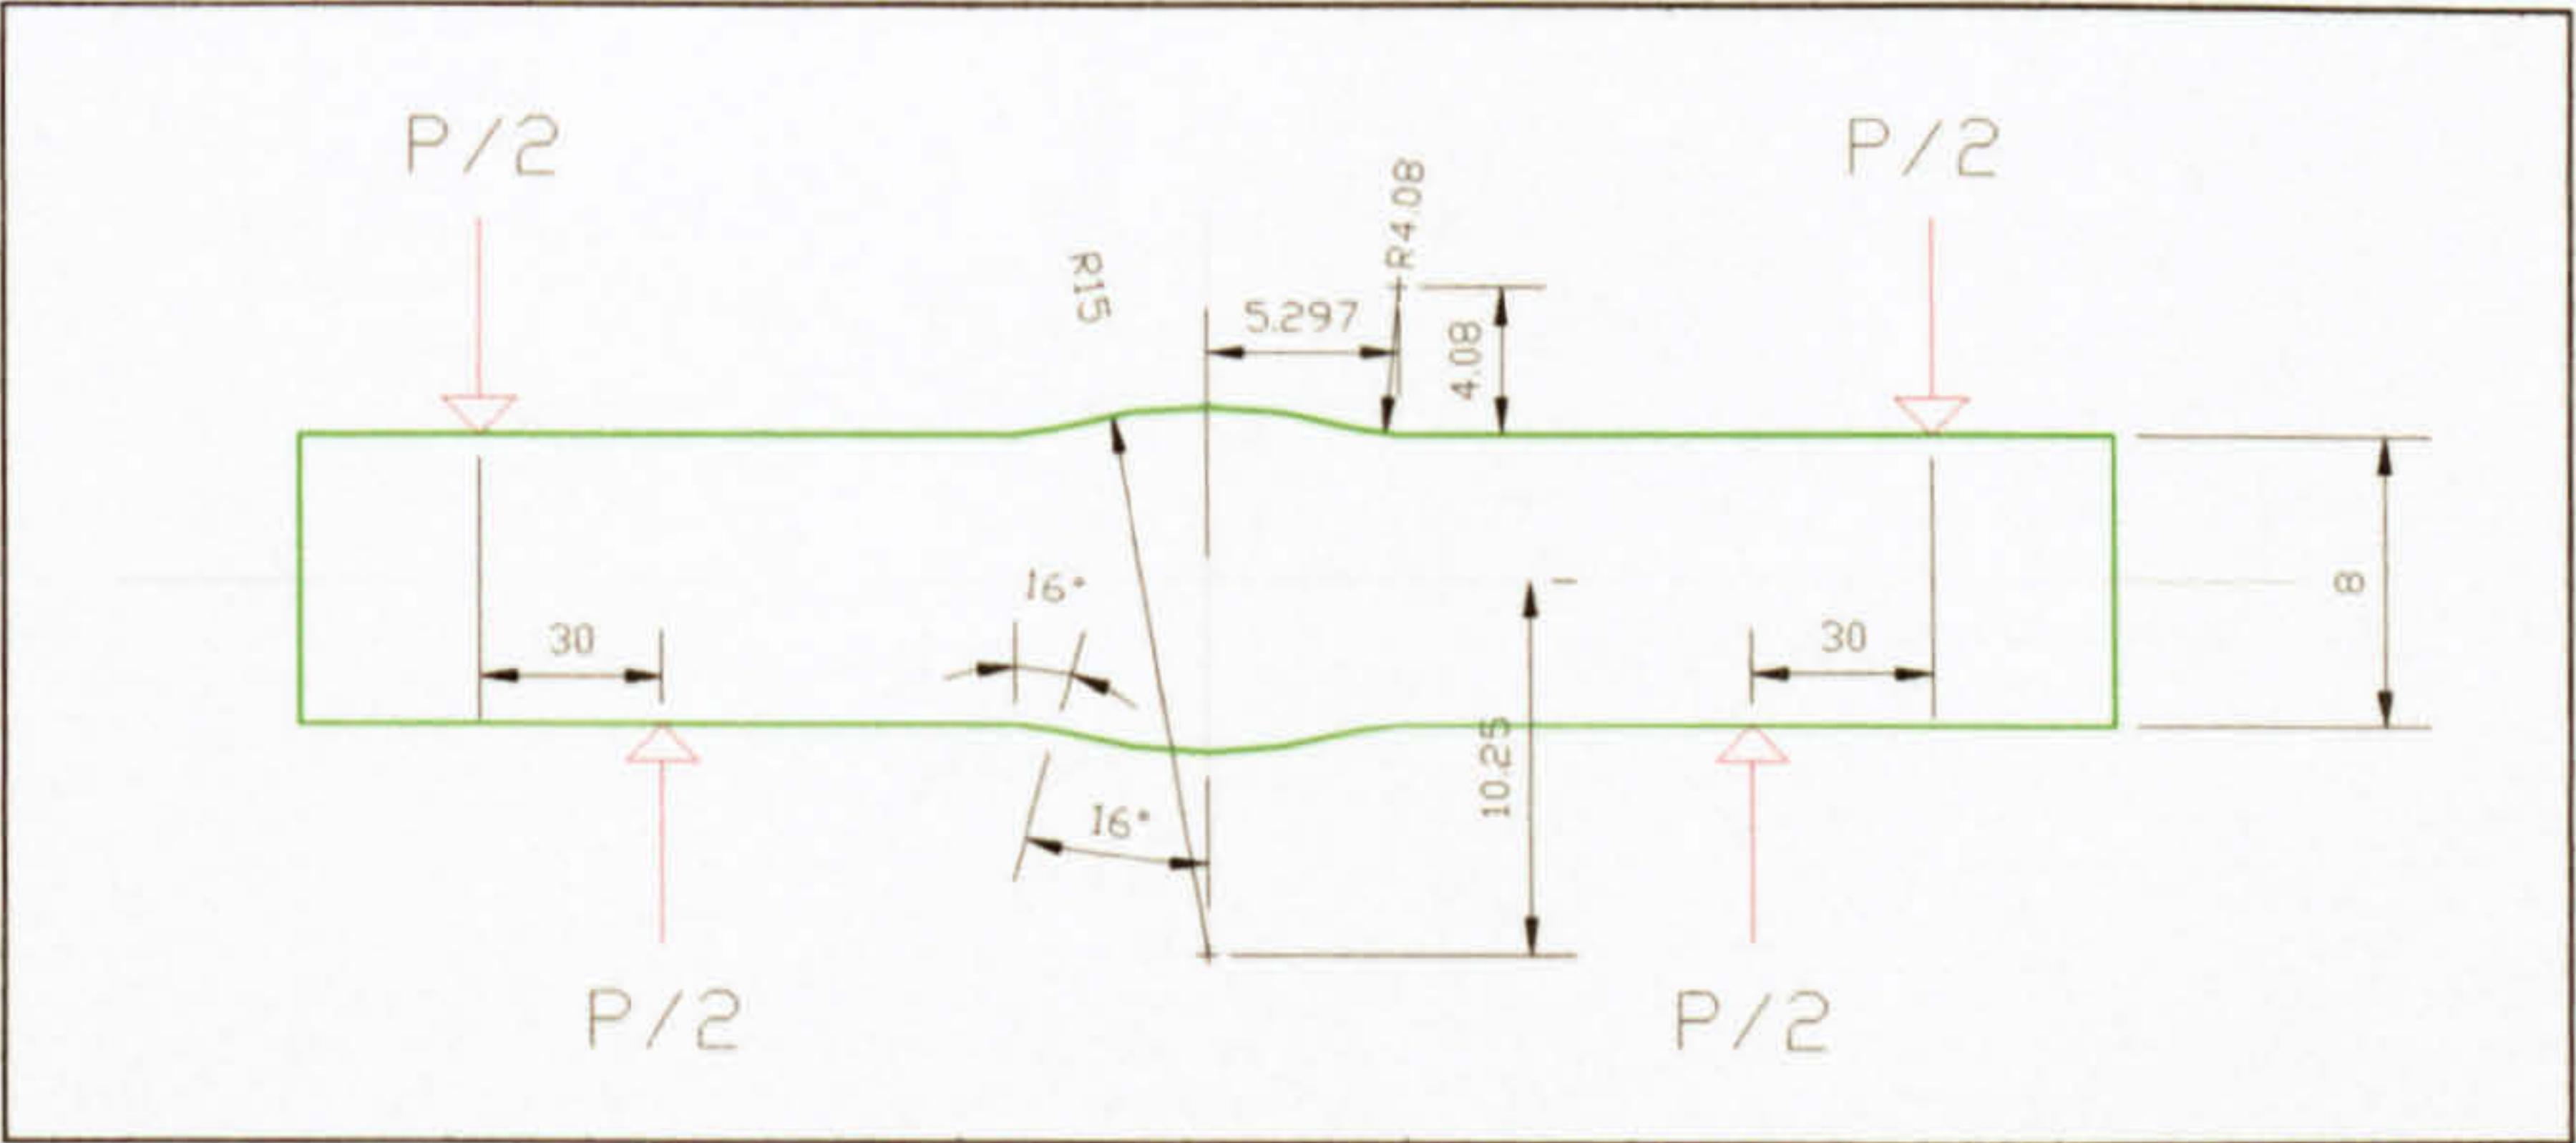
MIG LI (best case scenario, $r = 4.08$ mm) weld geometry utilising constant weld bead geometry and tangentially intersecting weld toe radius, $\theta' = 16^\circ$.
